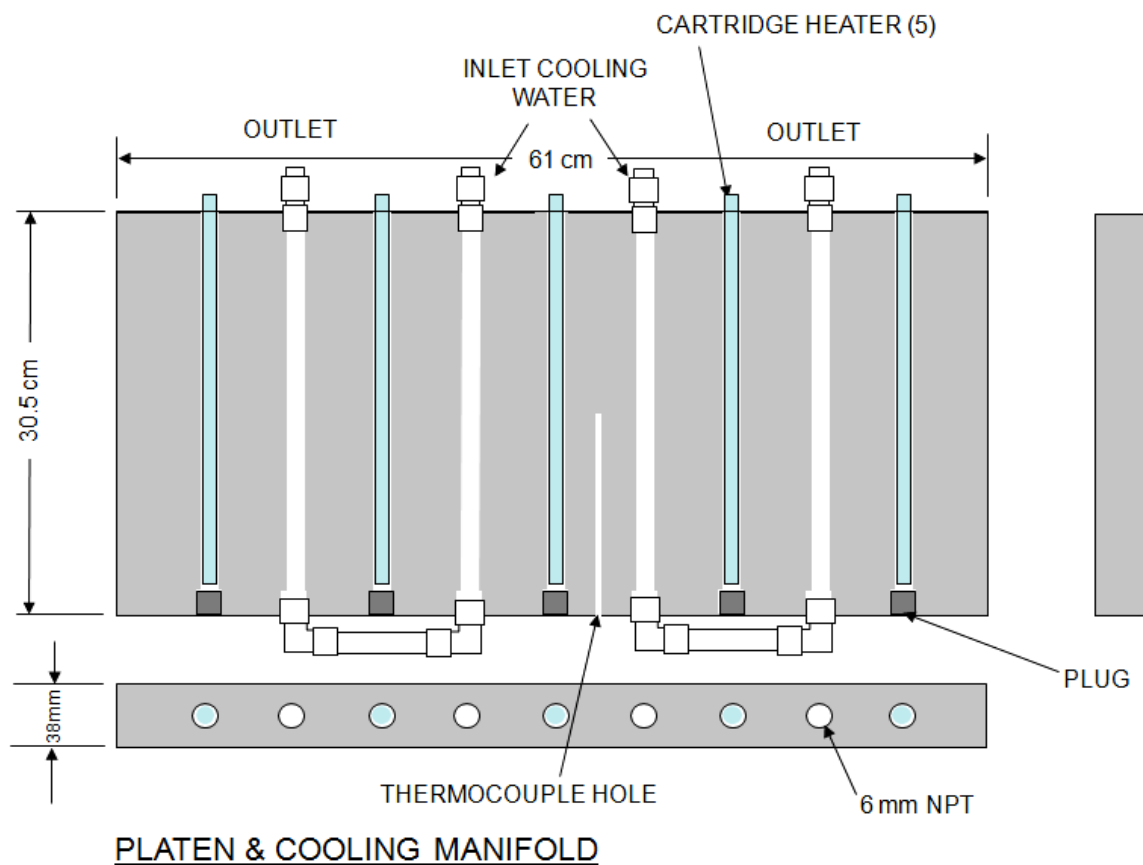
Platen assembly showing cooling and heating setup.
